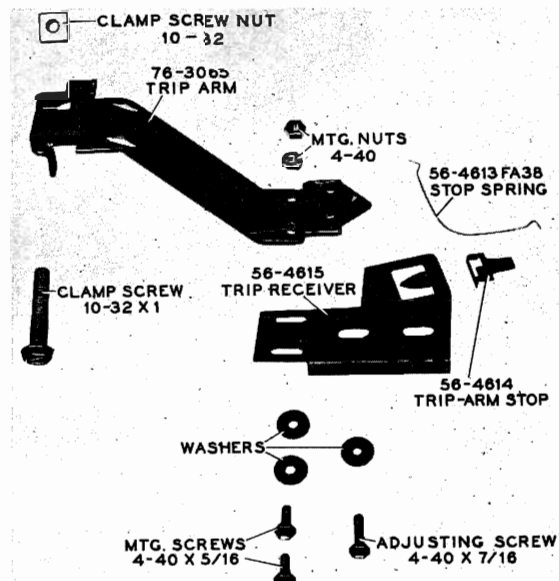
TRIP-ARM AND TRIP-RECEIVER ASSEMBLIES
